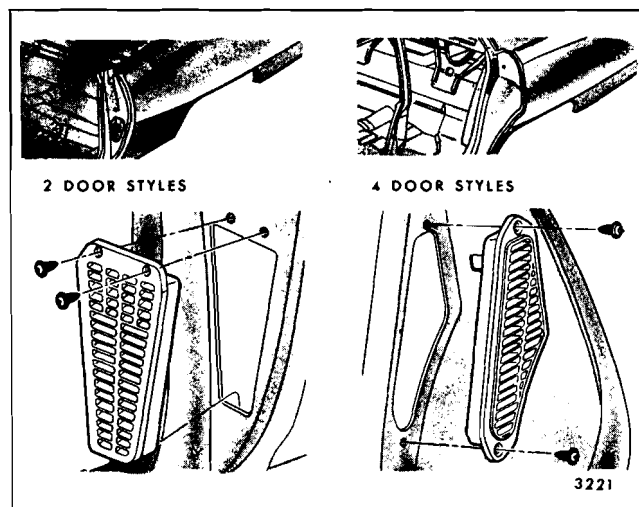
Pressure Relief Valve - "B & C" Styles Shown
